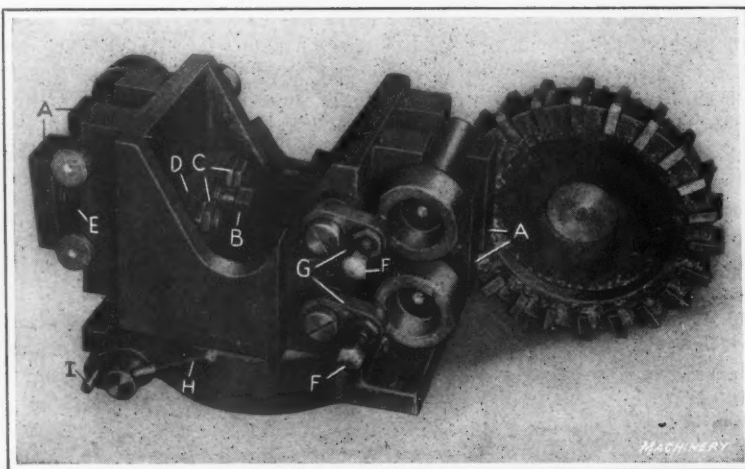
Indexing Fixture of Standard Design, equipped for holding Transmission Pinion Forgings for milling them to the Specified Length
